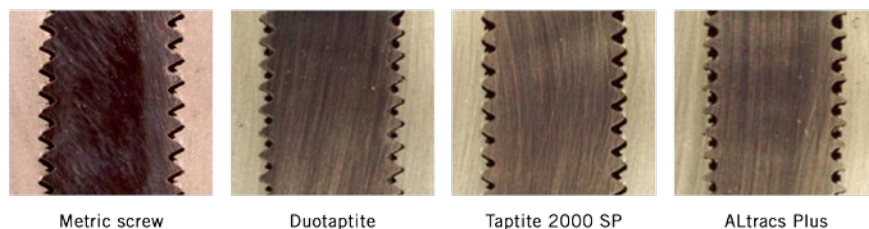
Overview of the microsections at maximum sized drill hole for the four screw types investigated (© FVA)
